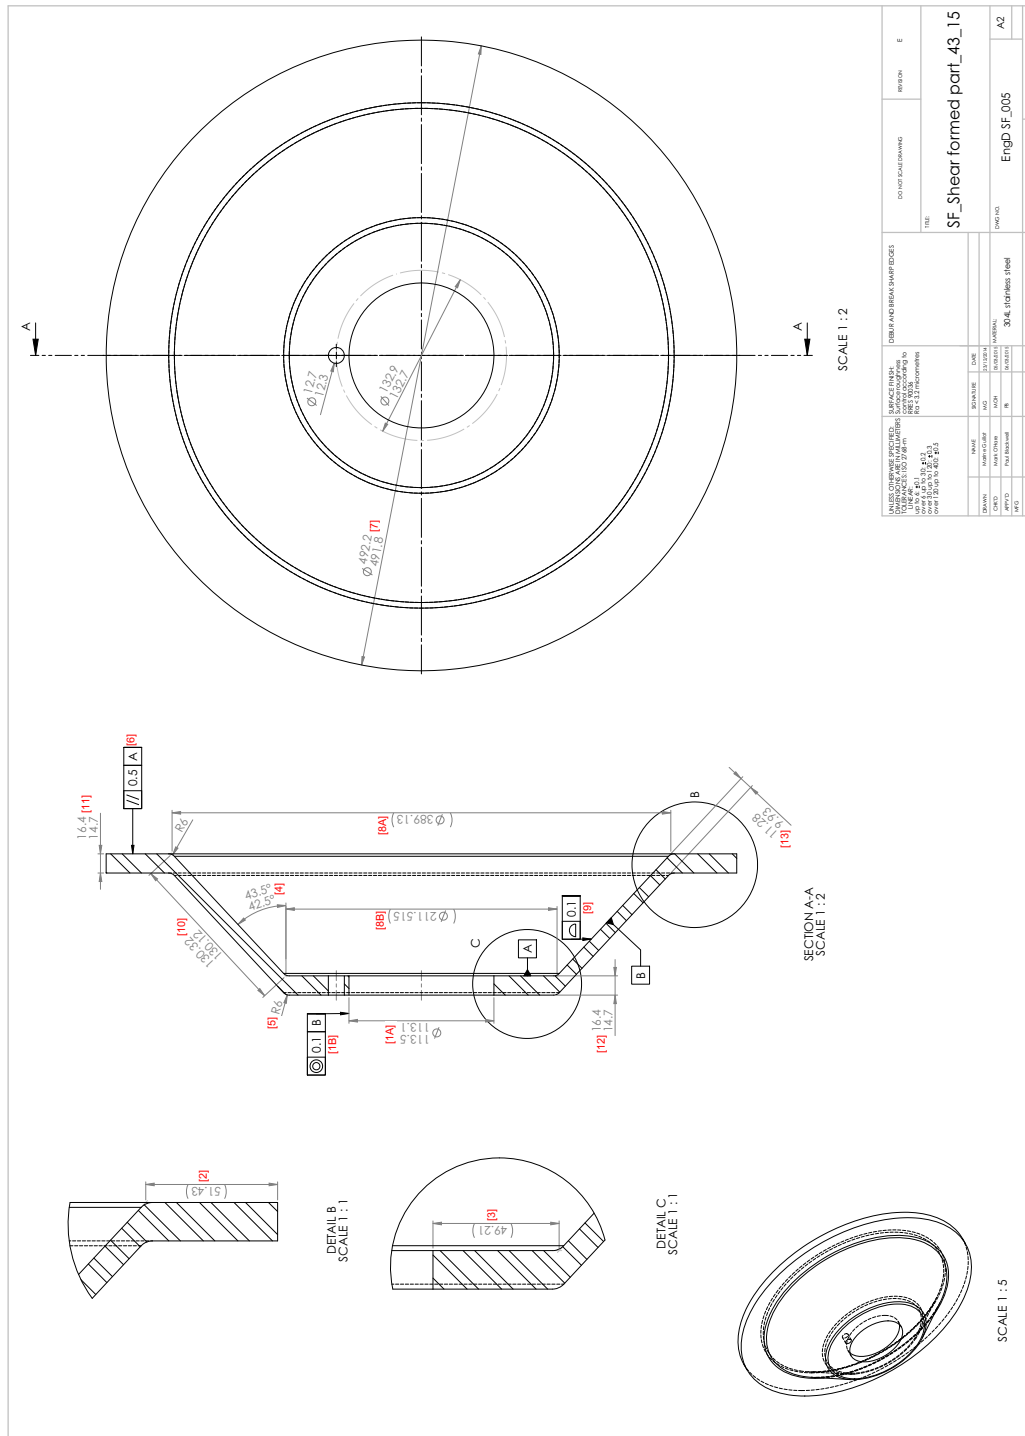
Drawing: Shear formed part – 43°, 15 mm thick, EngD – EngD SF\_005, “SF\_Shear formed part\_43\_15”.
